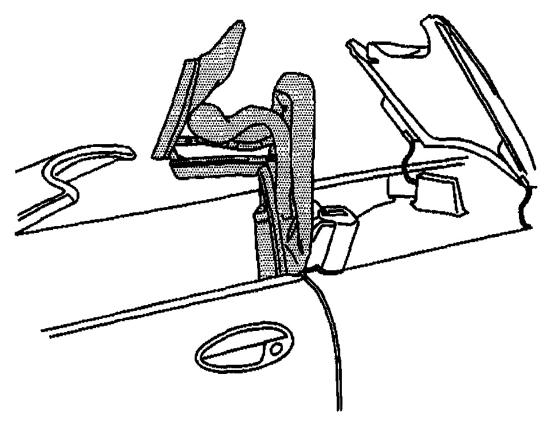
Identifying Latch Handle Bolts Courtesy of GENERAL MOTORS CORP.
